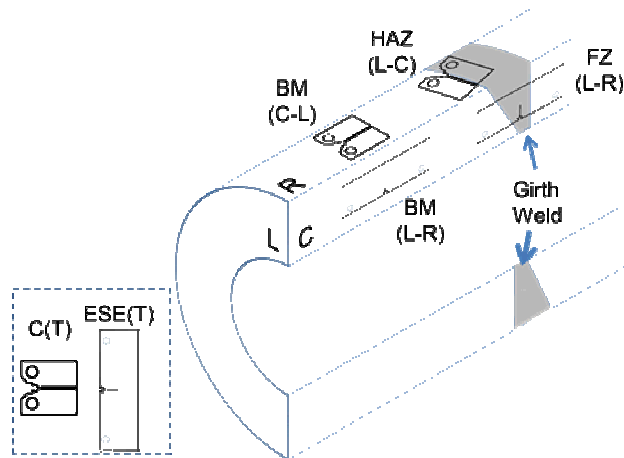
Schematic of gas metal arc welded pipeline with ESE(T) and C(T) specimens superimposed to show orientation tested for base metal (BM), heat-affected zone (HAZ), and fusion zone (FZ).
